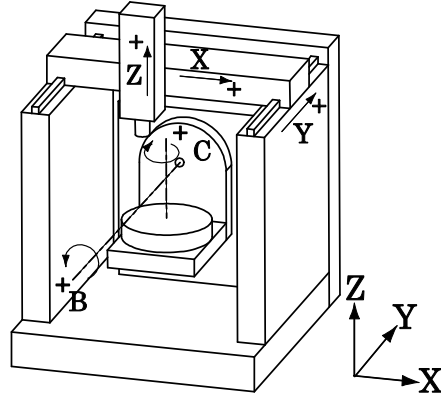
Configuration of the five-axis machine tool considered in this study.
